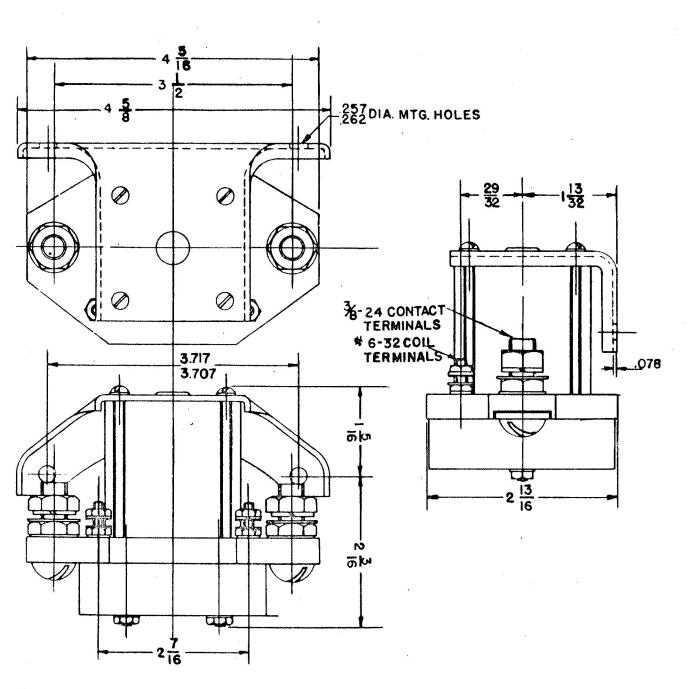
DIMENSIONAL VIEW - TYPE B-4 BATTERY AND STARTER
